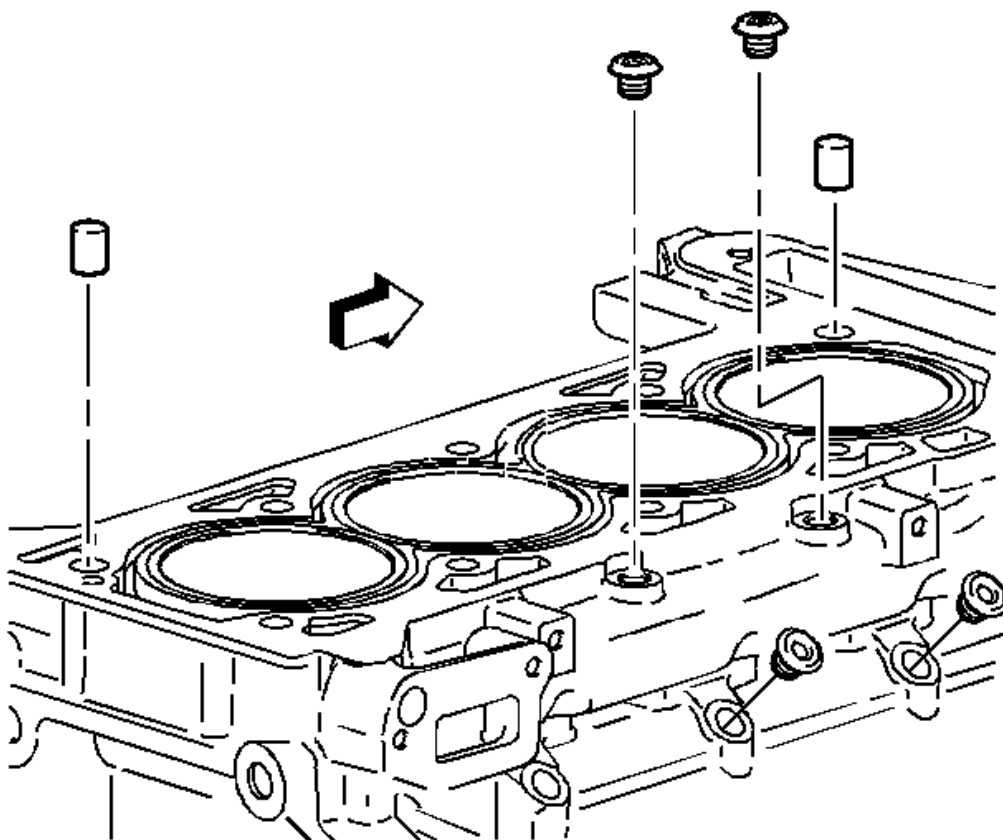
View Of Oil Passage Plug, Oil Flow Check Valve & Water Jacket Drain Plug
